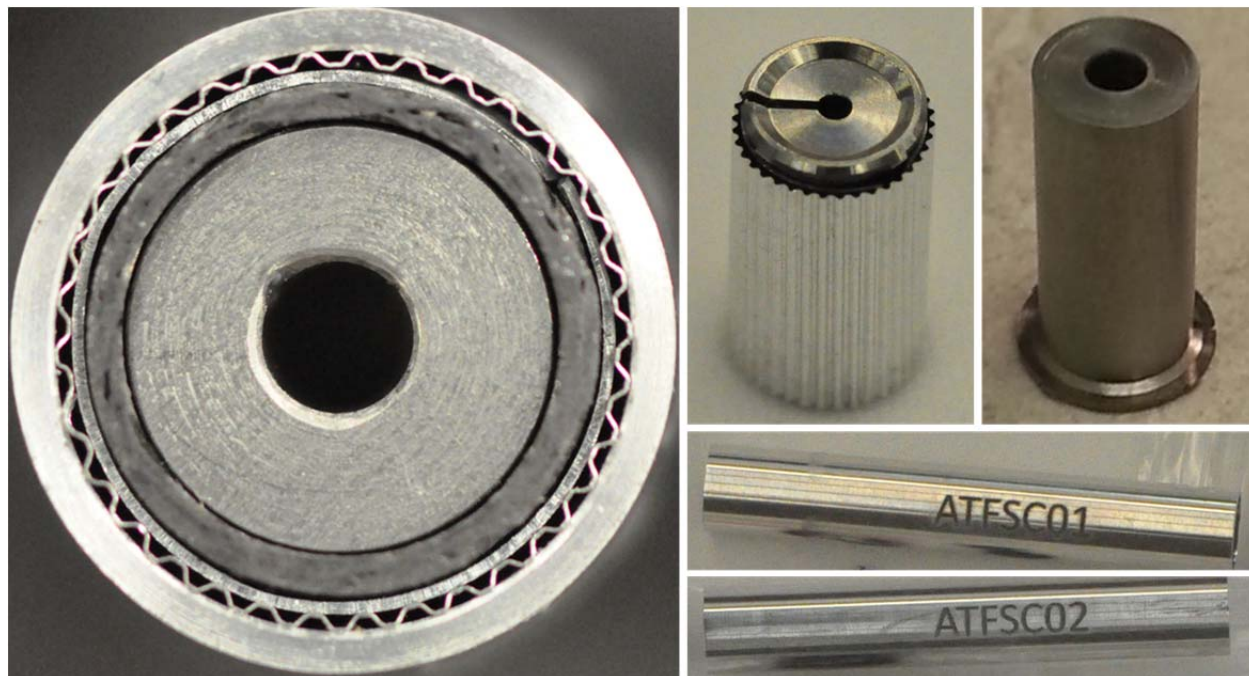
Pictures of sub-assembly in capsule housing (left), building of sub-assemblies (top right), and fully assembled capsules (bottom right)
